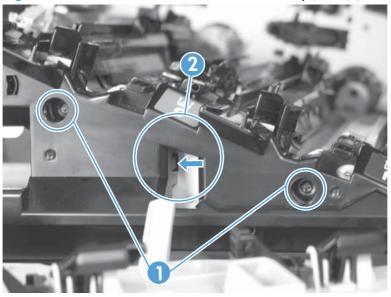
Remove the laser/scanner assembly (C/Bk) (5 of 7)
